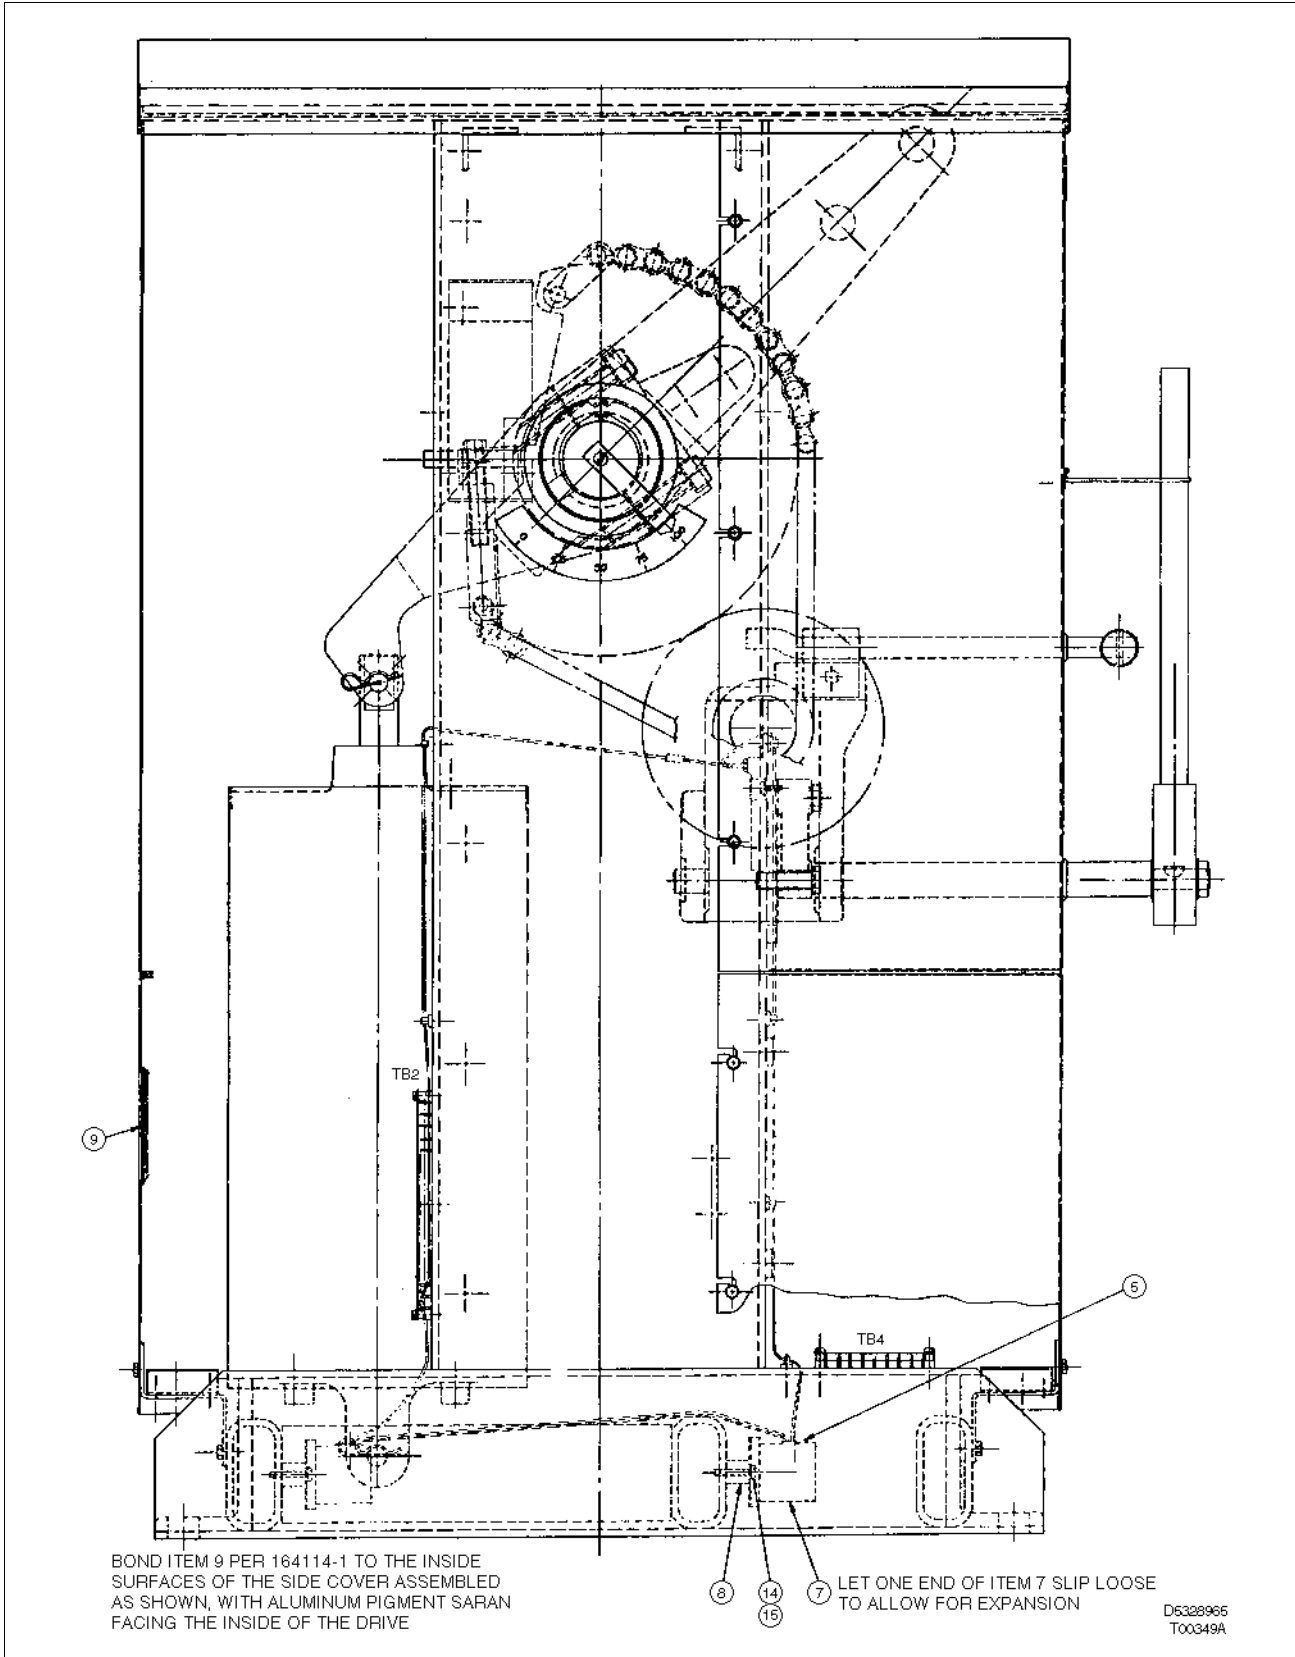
UP5 and UP6 Actuators with Heater, Table A-46 (Sheet 2 of 2)
